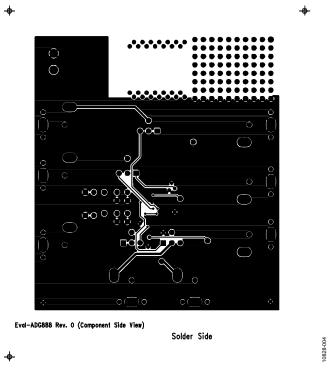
EVAL-ADG888EBZ Evaluation Board, Solder Side PCB Drawing
